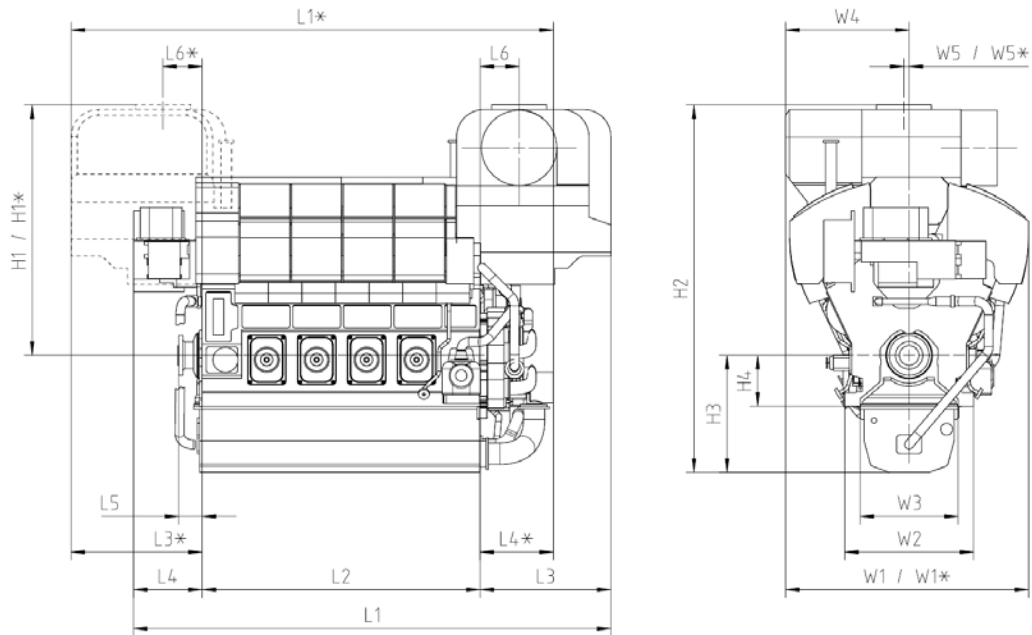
W8V31 & W10V31 Main engine dimensions (DAAF336230C)
